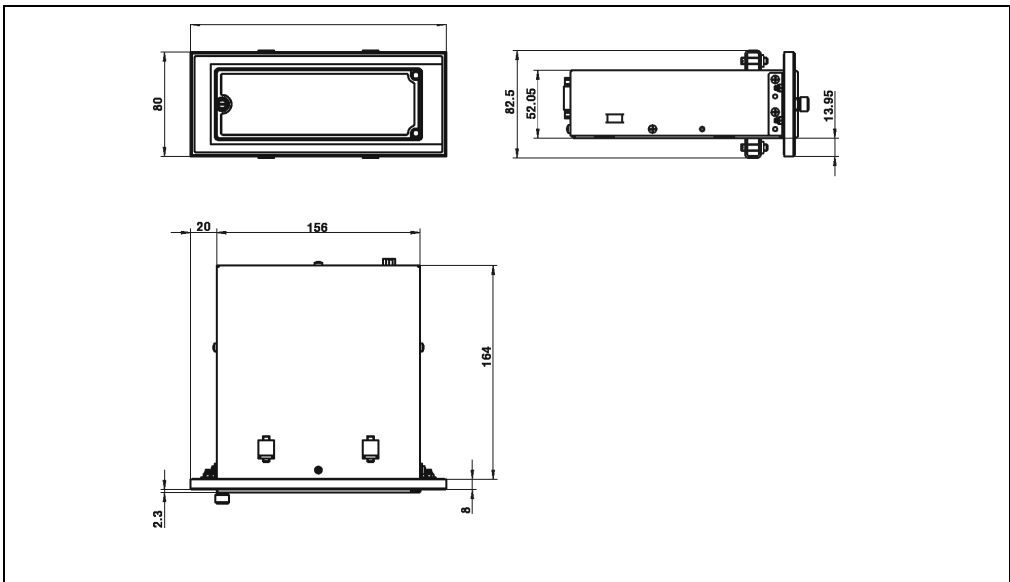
Dimensions 5A5003.02 with 5A5003.03
